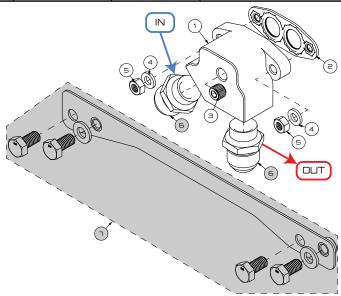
GTO / Commodore Assembly, Parts & Plumbing
